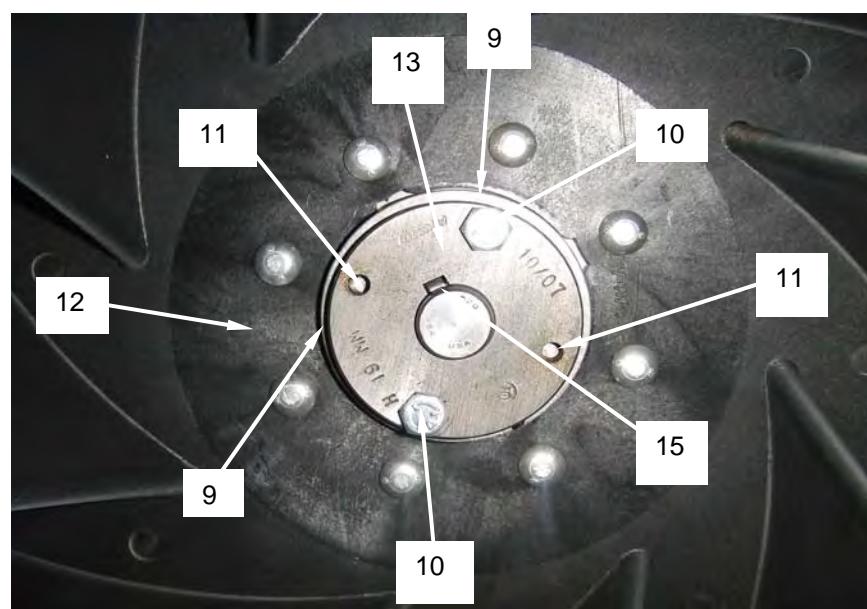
Replace Inlet Fan Assembly (Sheet 1 of 2)
